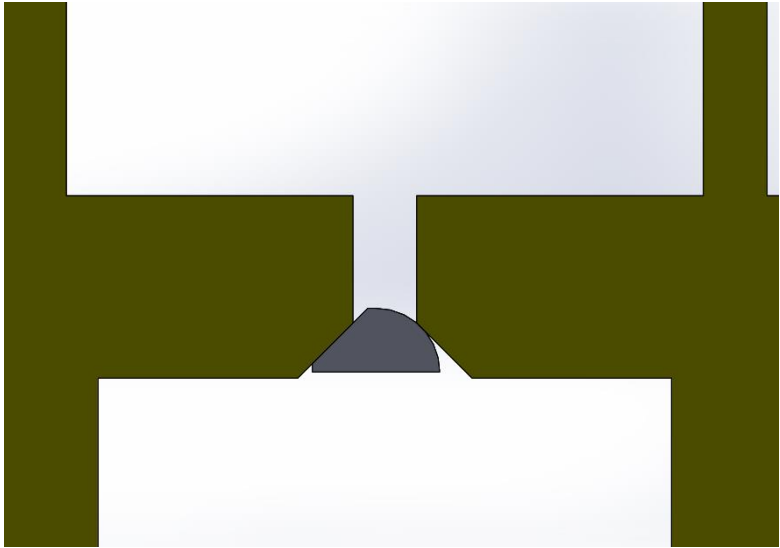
Zoom, underplatform damper in contact with the blades.
